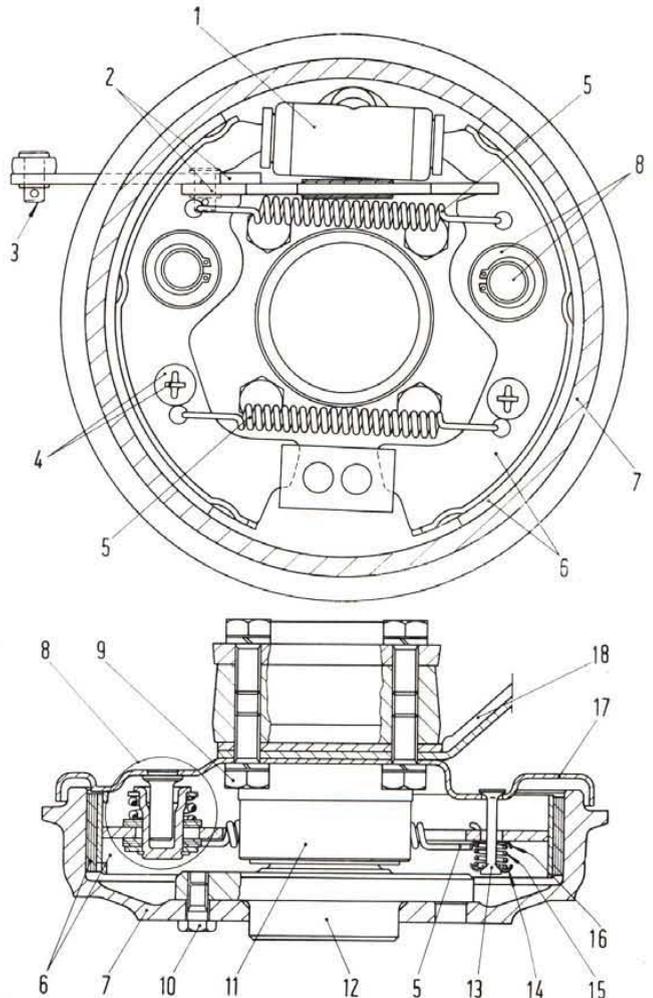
Right rear wheel sectional views (from car with No. for spare 802093).
